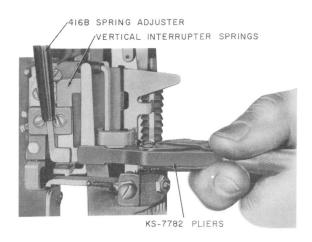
Method of Adjusting U-Shaped Springs on Vertical Interrupter Spring Assembly
